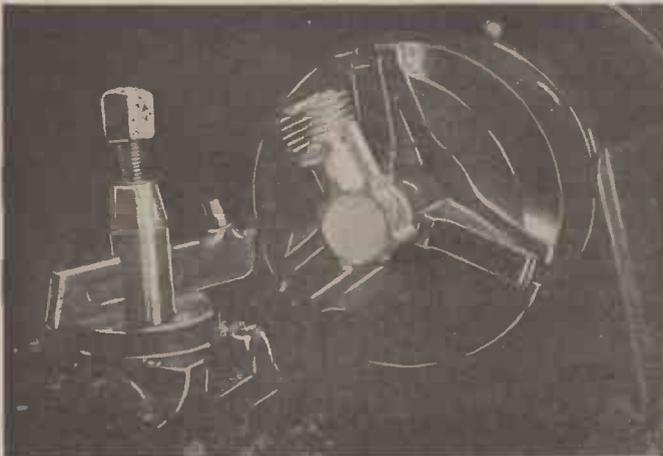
The second face finished parallel to the first one. Note that the machining cuts slightly into the cylinder wall on both sides.
